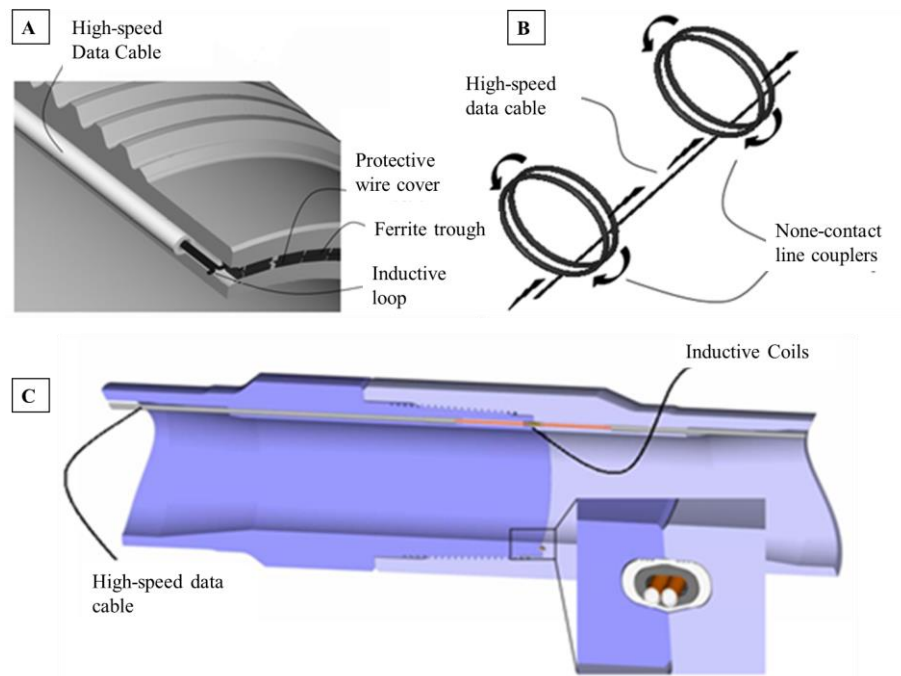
(A) Cutaway view of the telemetry drill pipe system in a drill pipe connection. The inductive coil fits in a shallow groove inside the secondary torque shoulder of the tool joint. (B) The non-contact line coupler uses induction to transmit data from one connection to another [22]. (C) Cutaway of a made-up drill pipe tool joint connection showing the location of the inductive coils and data conduit [23].
